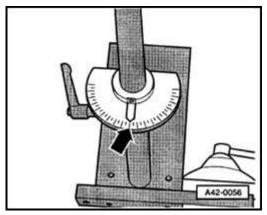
Tensioning Suspension Strut With Spring Compressor Vertically In Spring Mounting Tool V.A.G 1752/2
